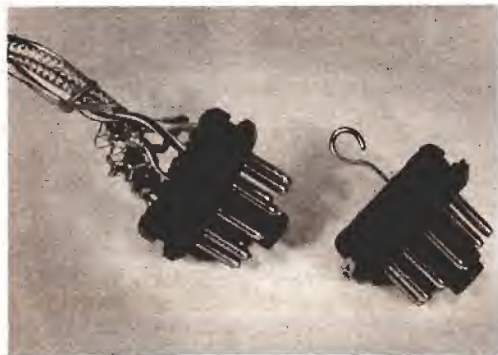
CONNECTION PLUG for accessory units. Loop made from tinned wire, soldered into pin 1, provides chassis connection for outer conductor of shielded wires in cable.
